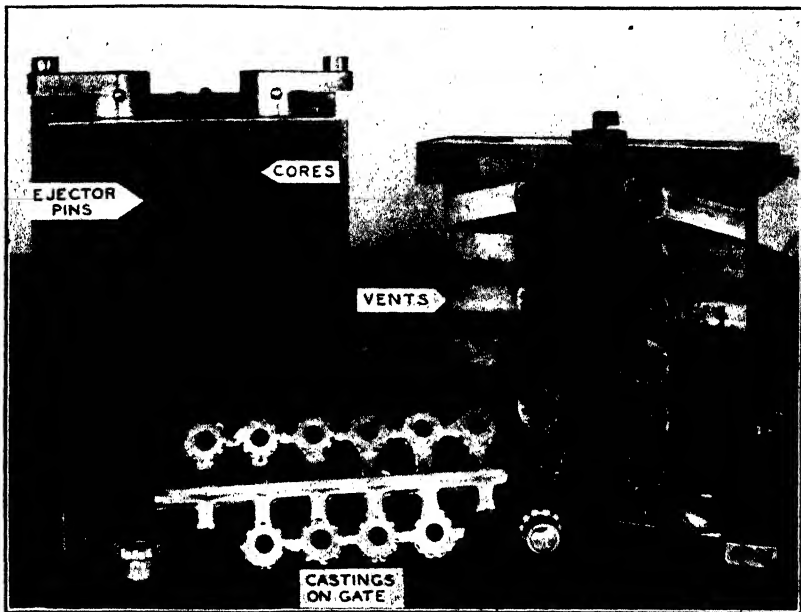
AIR-OPERATED DIE-CASTING MACHINE
